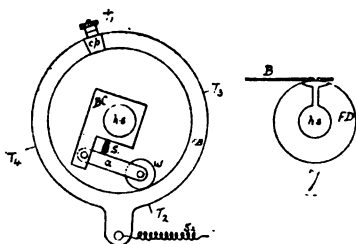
Commutator. Fig. 7.—Wipe contact breaker.
